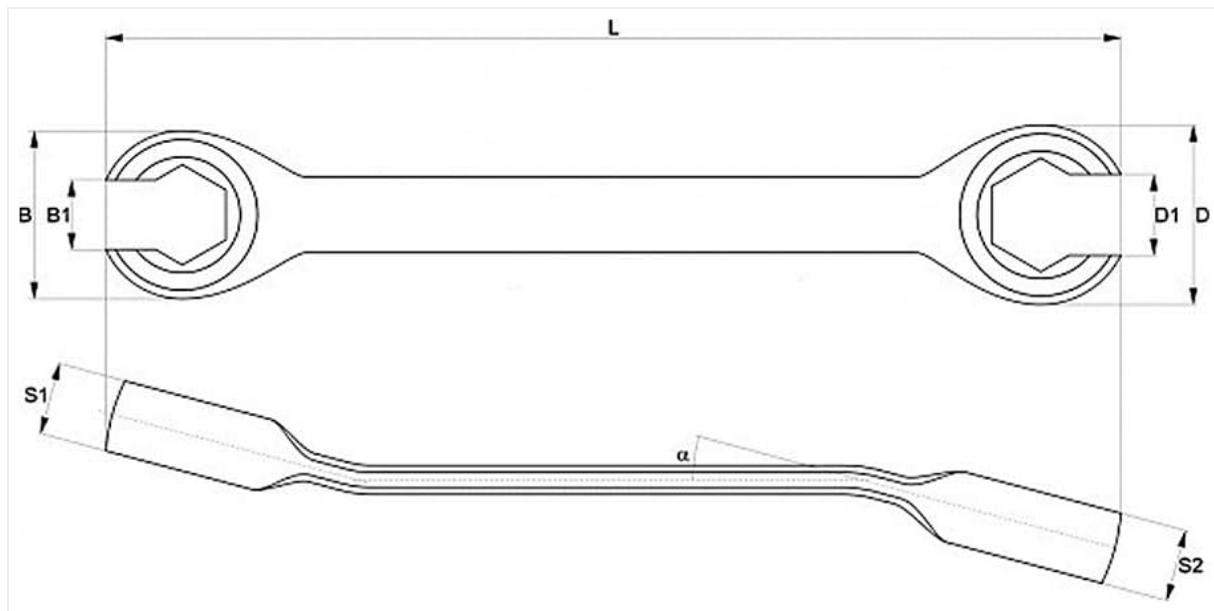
Technical drawing illustrating the dimensions of the double ring spanner.
